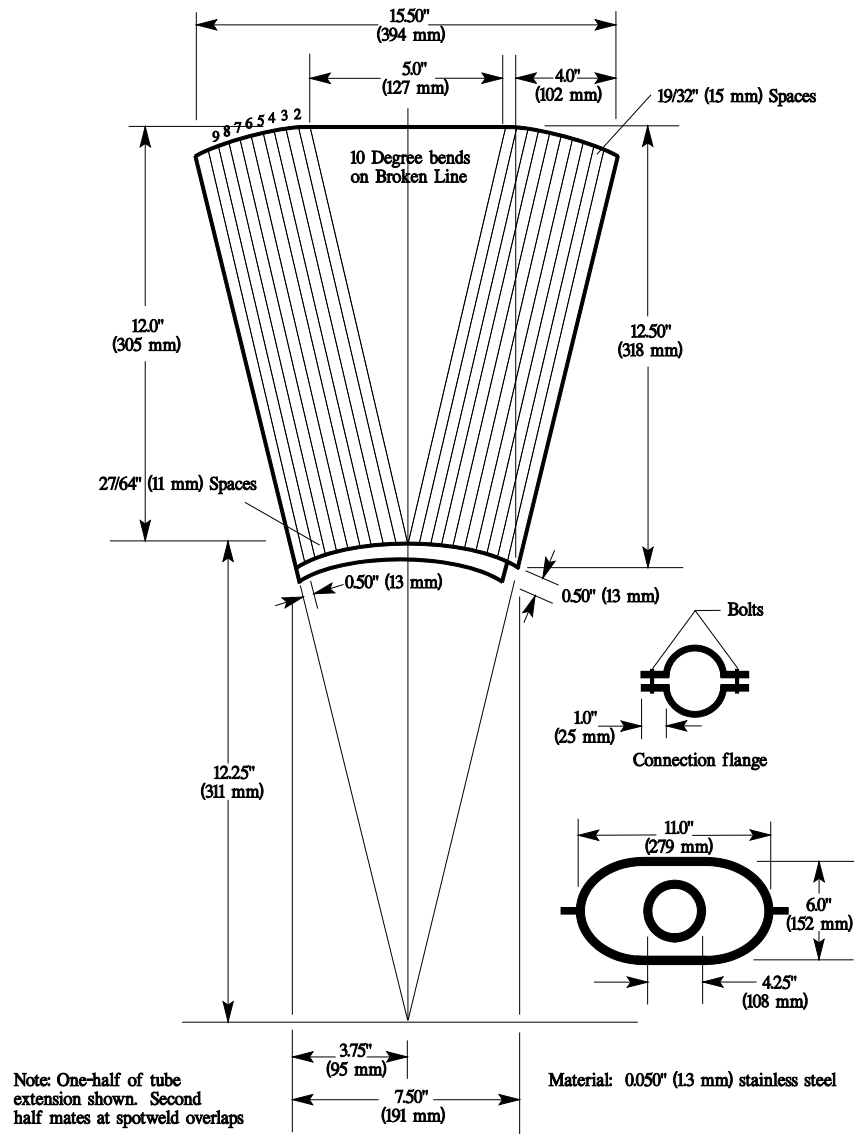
Burner Draft Tube Extension Cone Diagram
